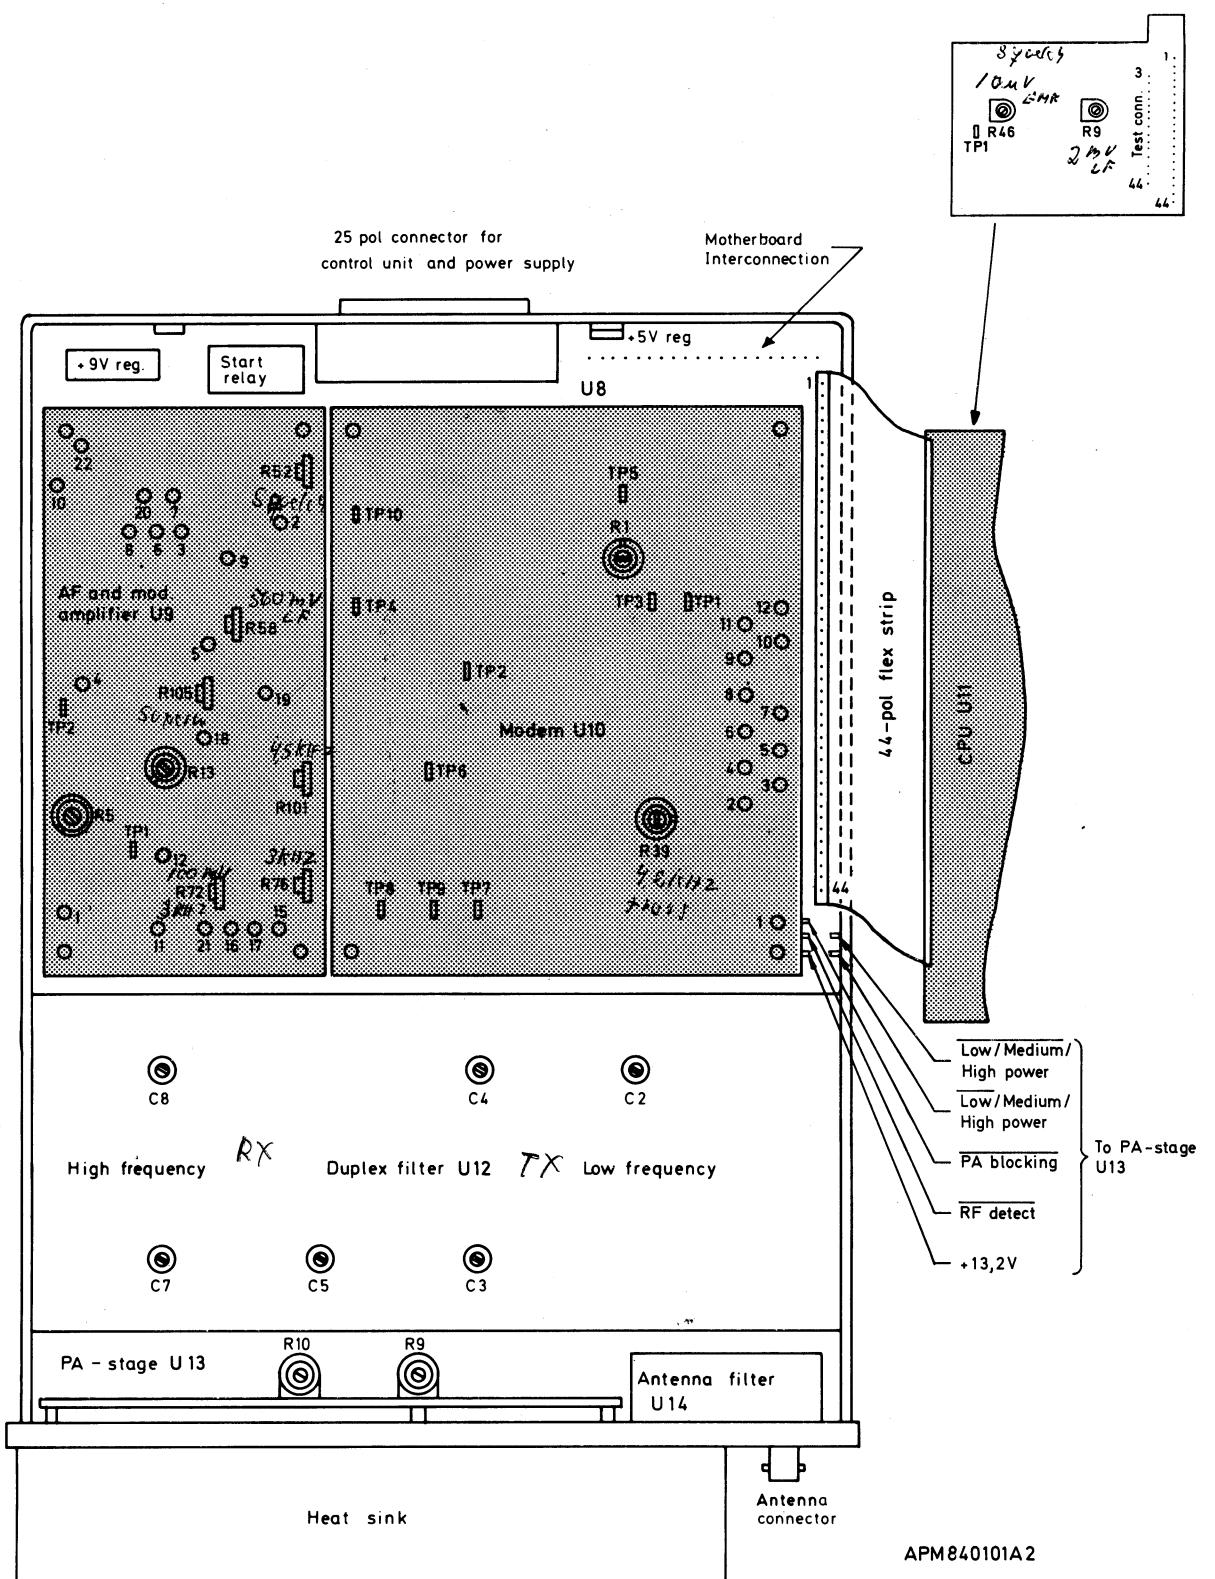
Location of adjusting elements, test points and terminals. "CPU side"
